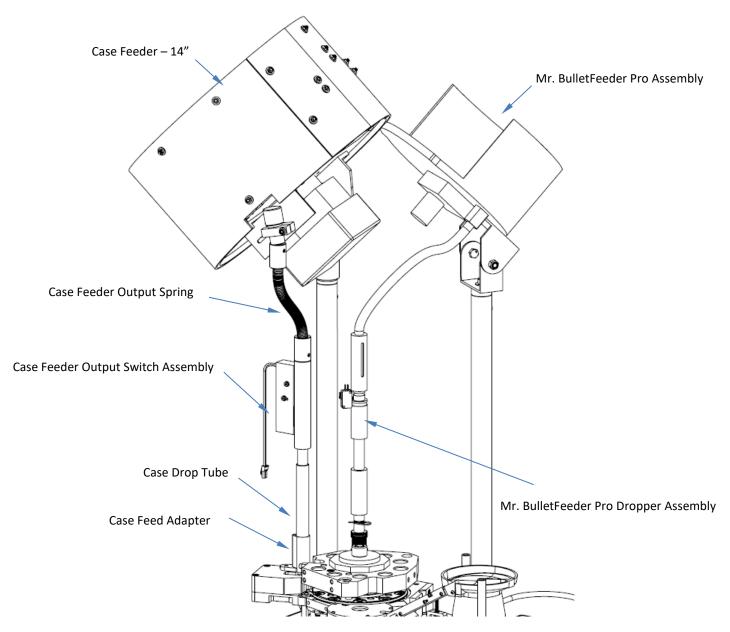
Case feeder drop tube assembly and Bullet feeder installation.
